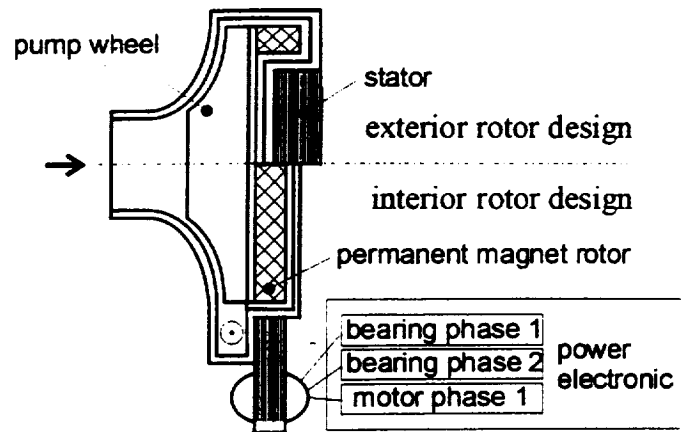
Principle construction of the bearingless motor in exterior rotor design.
